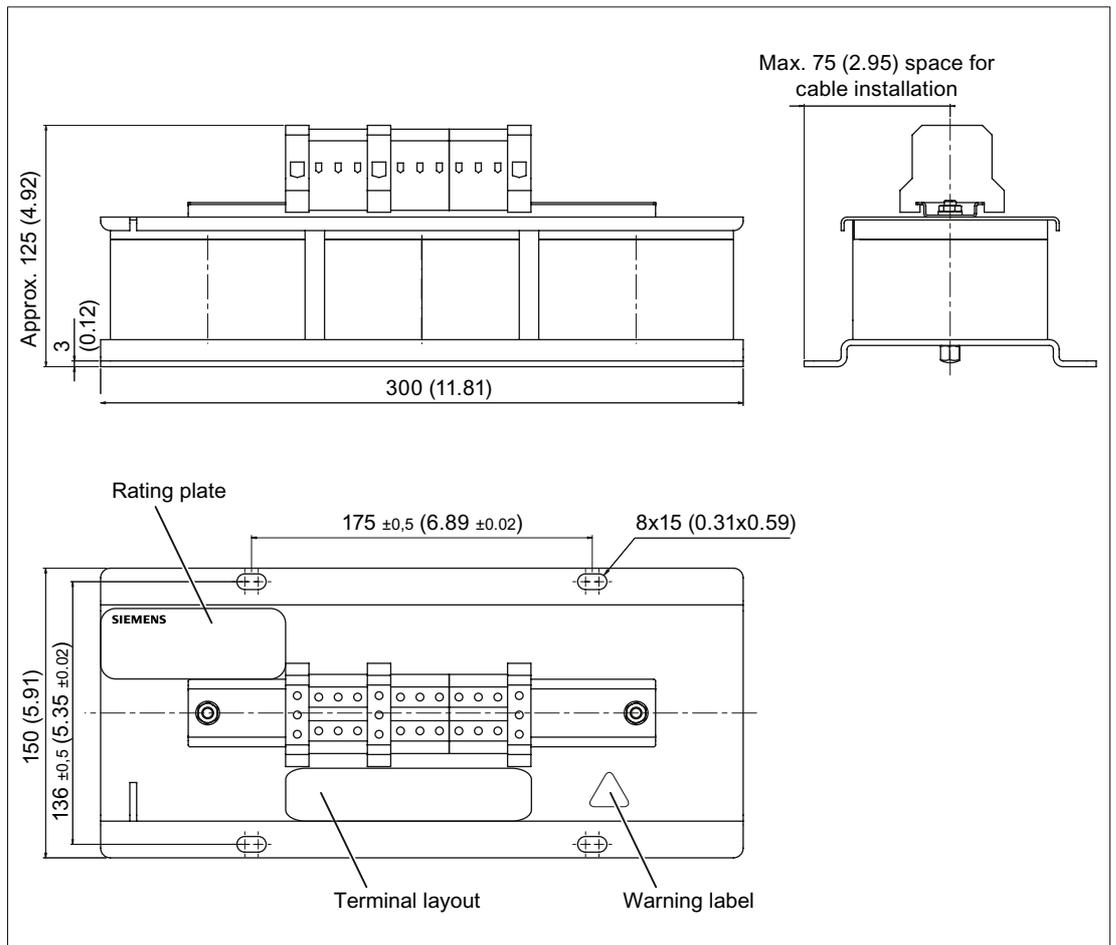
Dimension drawing of HFD line reactor 16 kW, all dimensions in mm and (inches)
